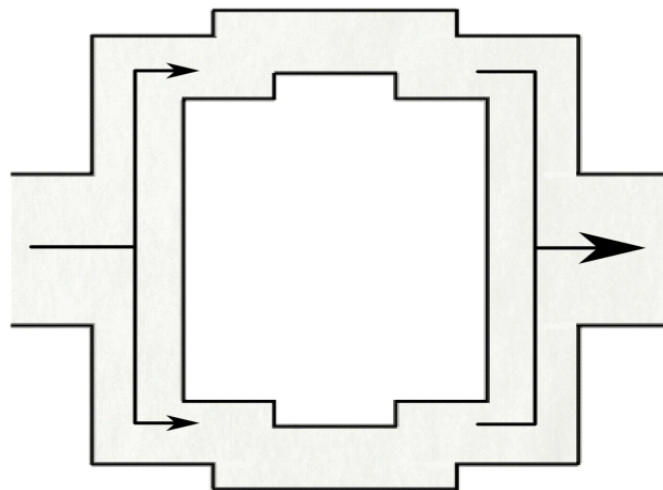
Weld line formation due to obstacle in new testing mold
